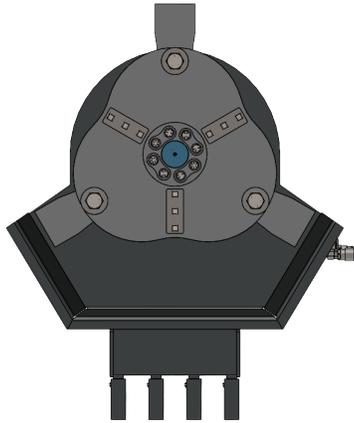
Bolt Head Bead Weld & Assembly
